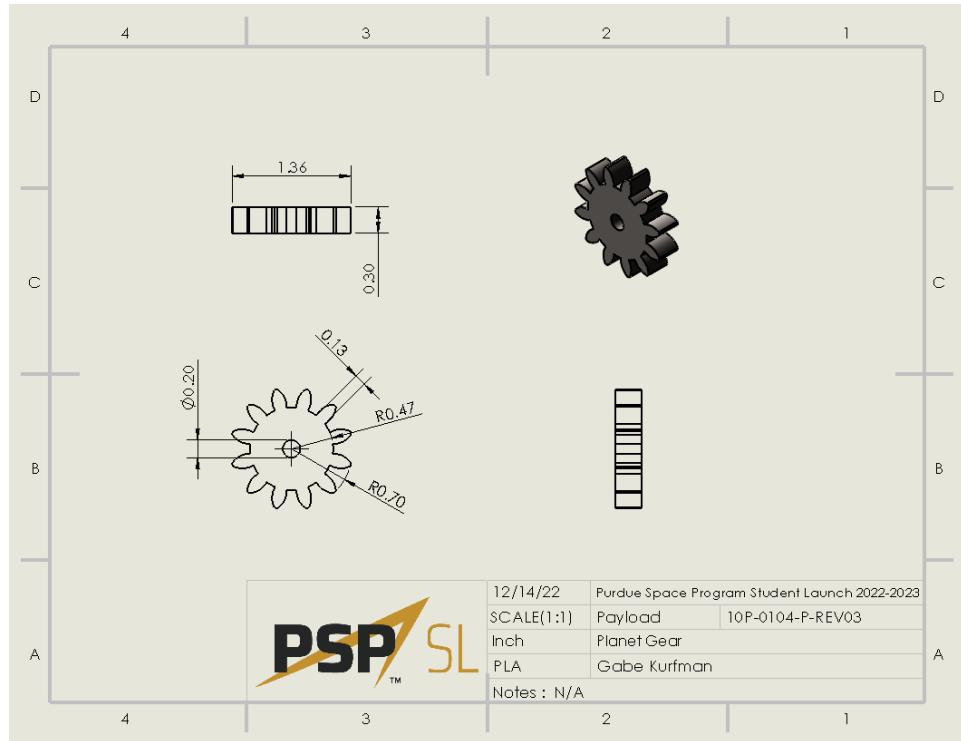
IOS Planet Gear Technical Drawing
